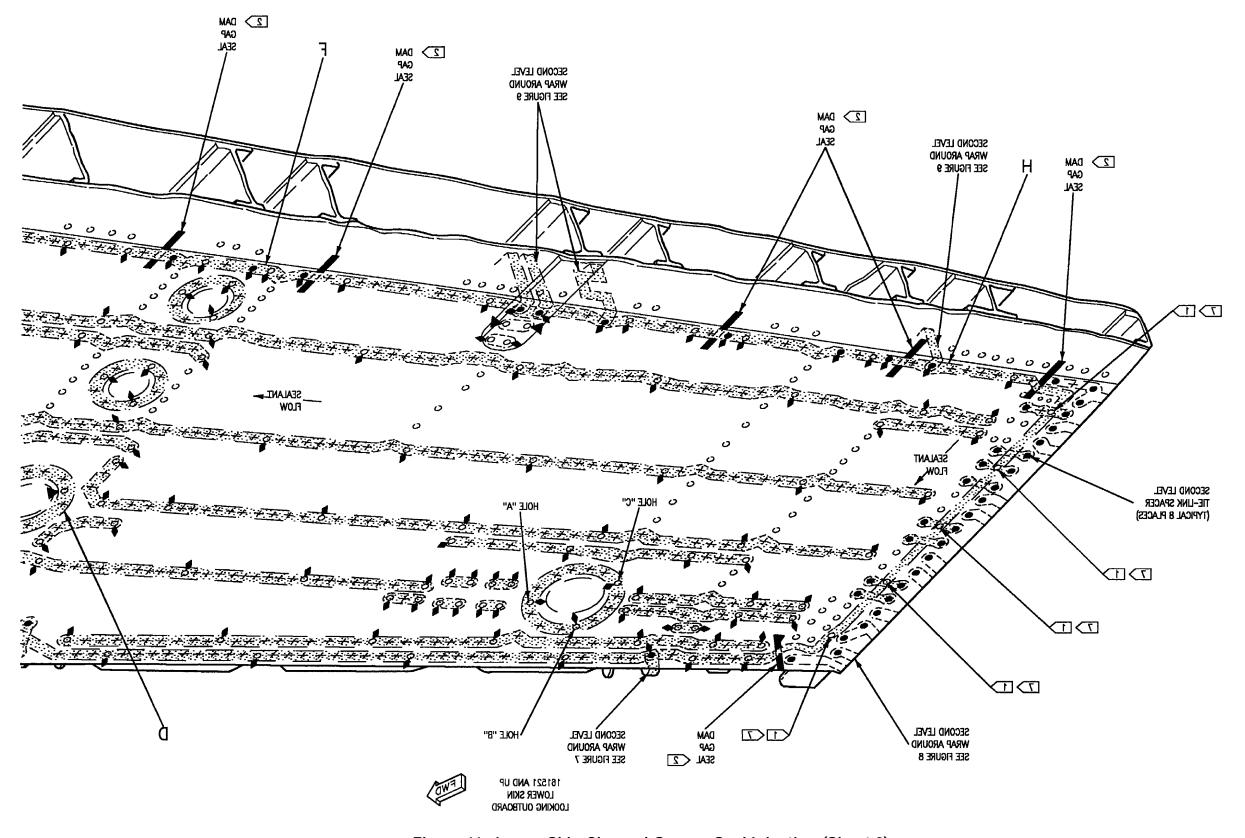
Lower Skin Channel Groove Seal Injection (Sheet 3)
